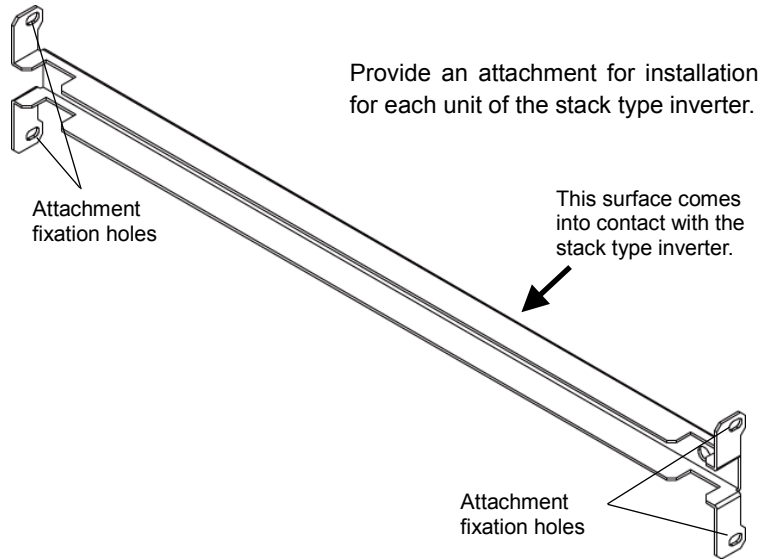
Attachment for fixing upper section (recommended)
